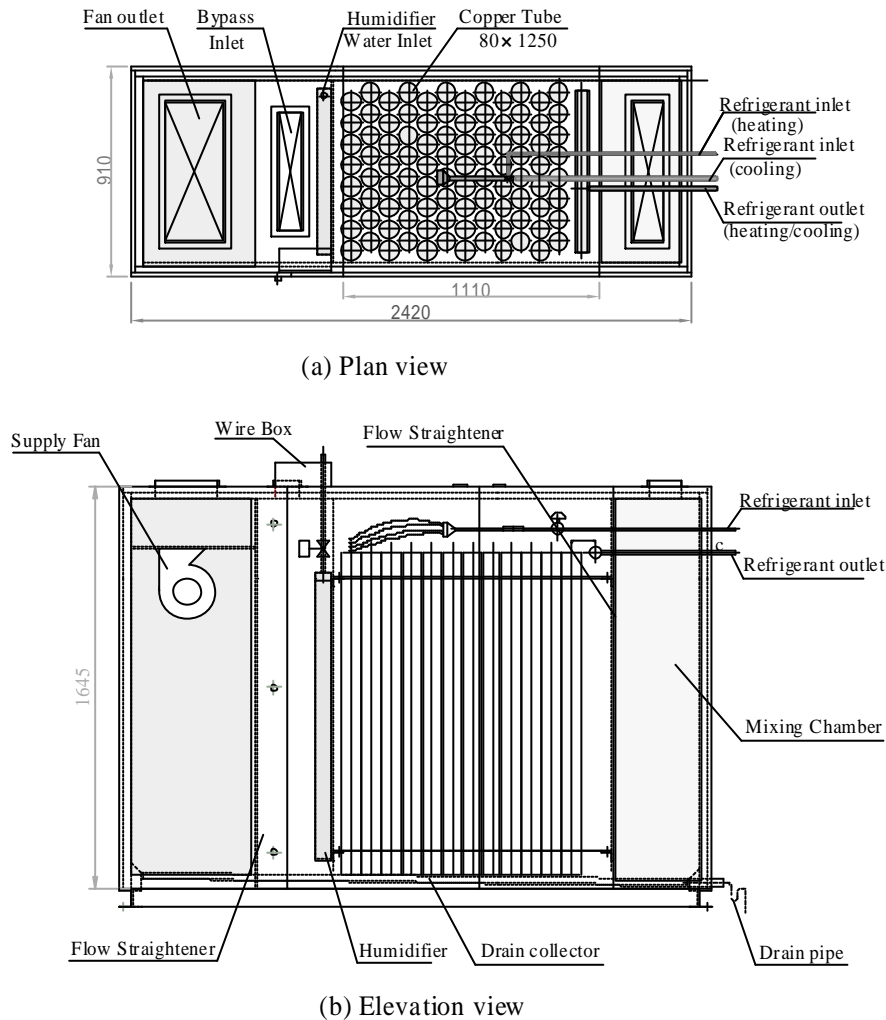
Plan view and elevation of the proposed thermal storage air handling unit
